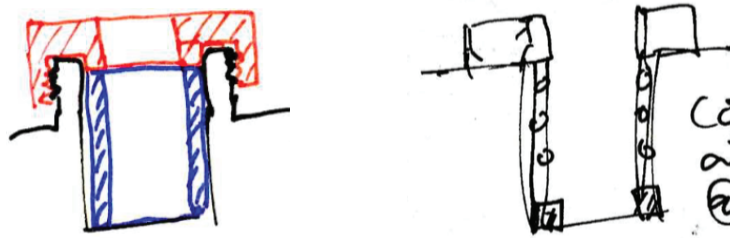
External screw mount: A screw or bayonet mount to the top of the MPS compresses an elastic tube (left) or a spring (right) to provide a downward sealing force on the scaffold assembly.
